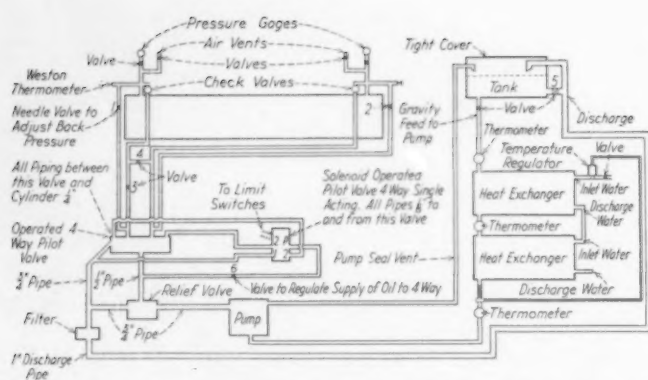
Piping Design for Machine Shown on Figs. 8 to 9.
